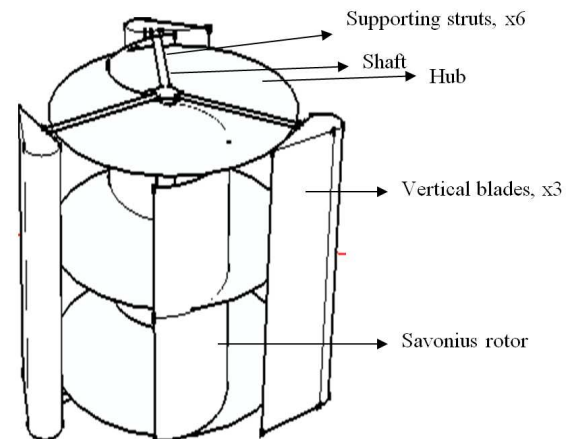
CAD Design for the complete assembly of the hybrid VAWT.
